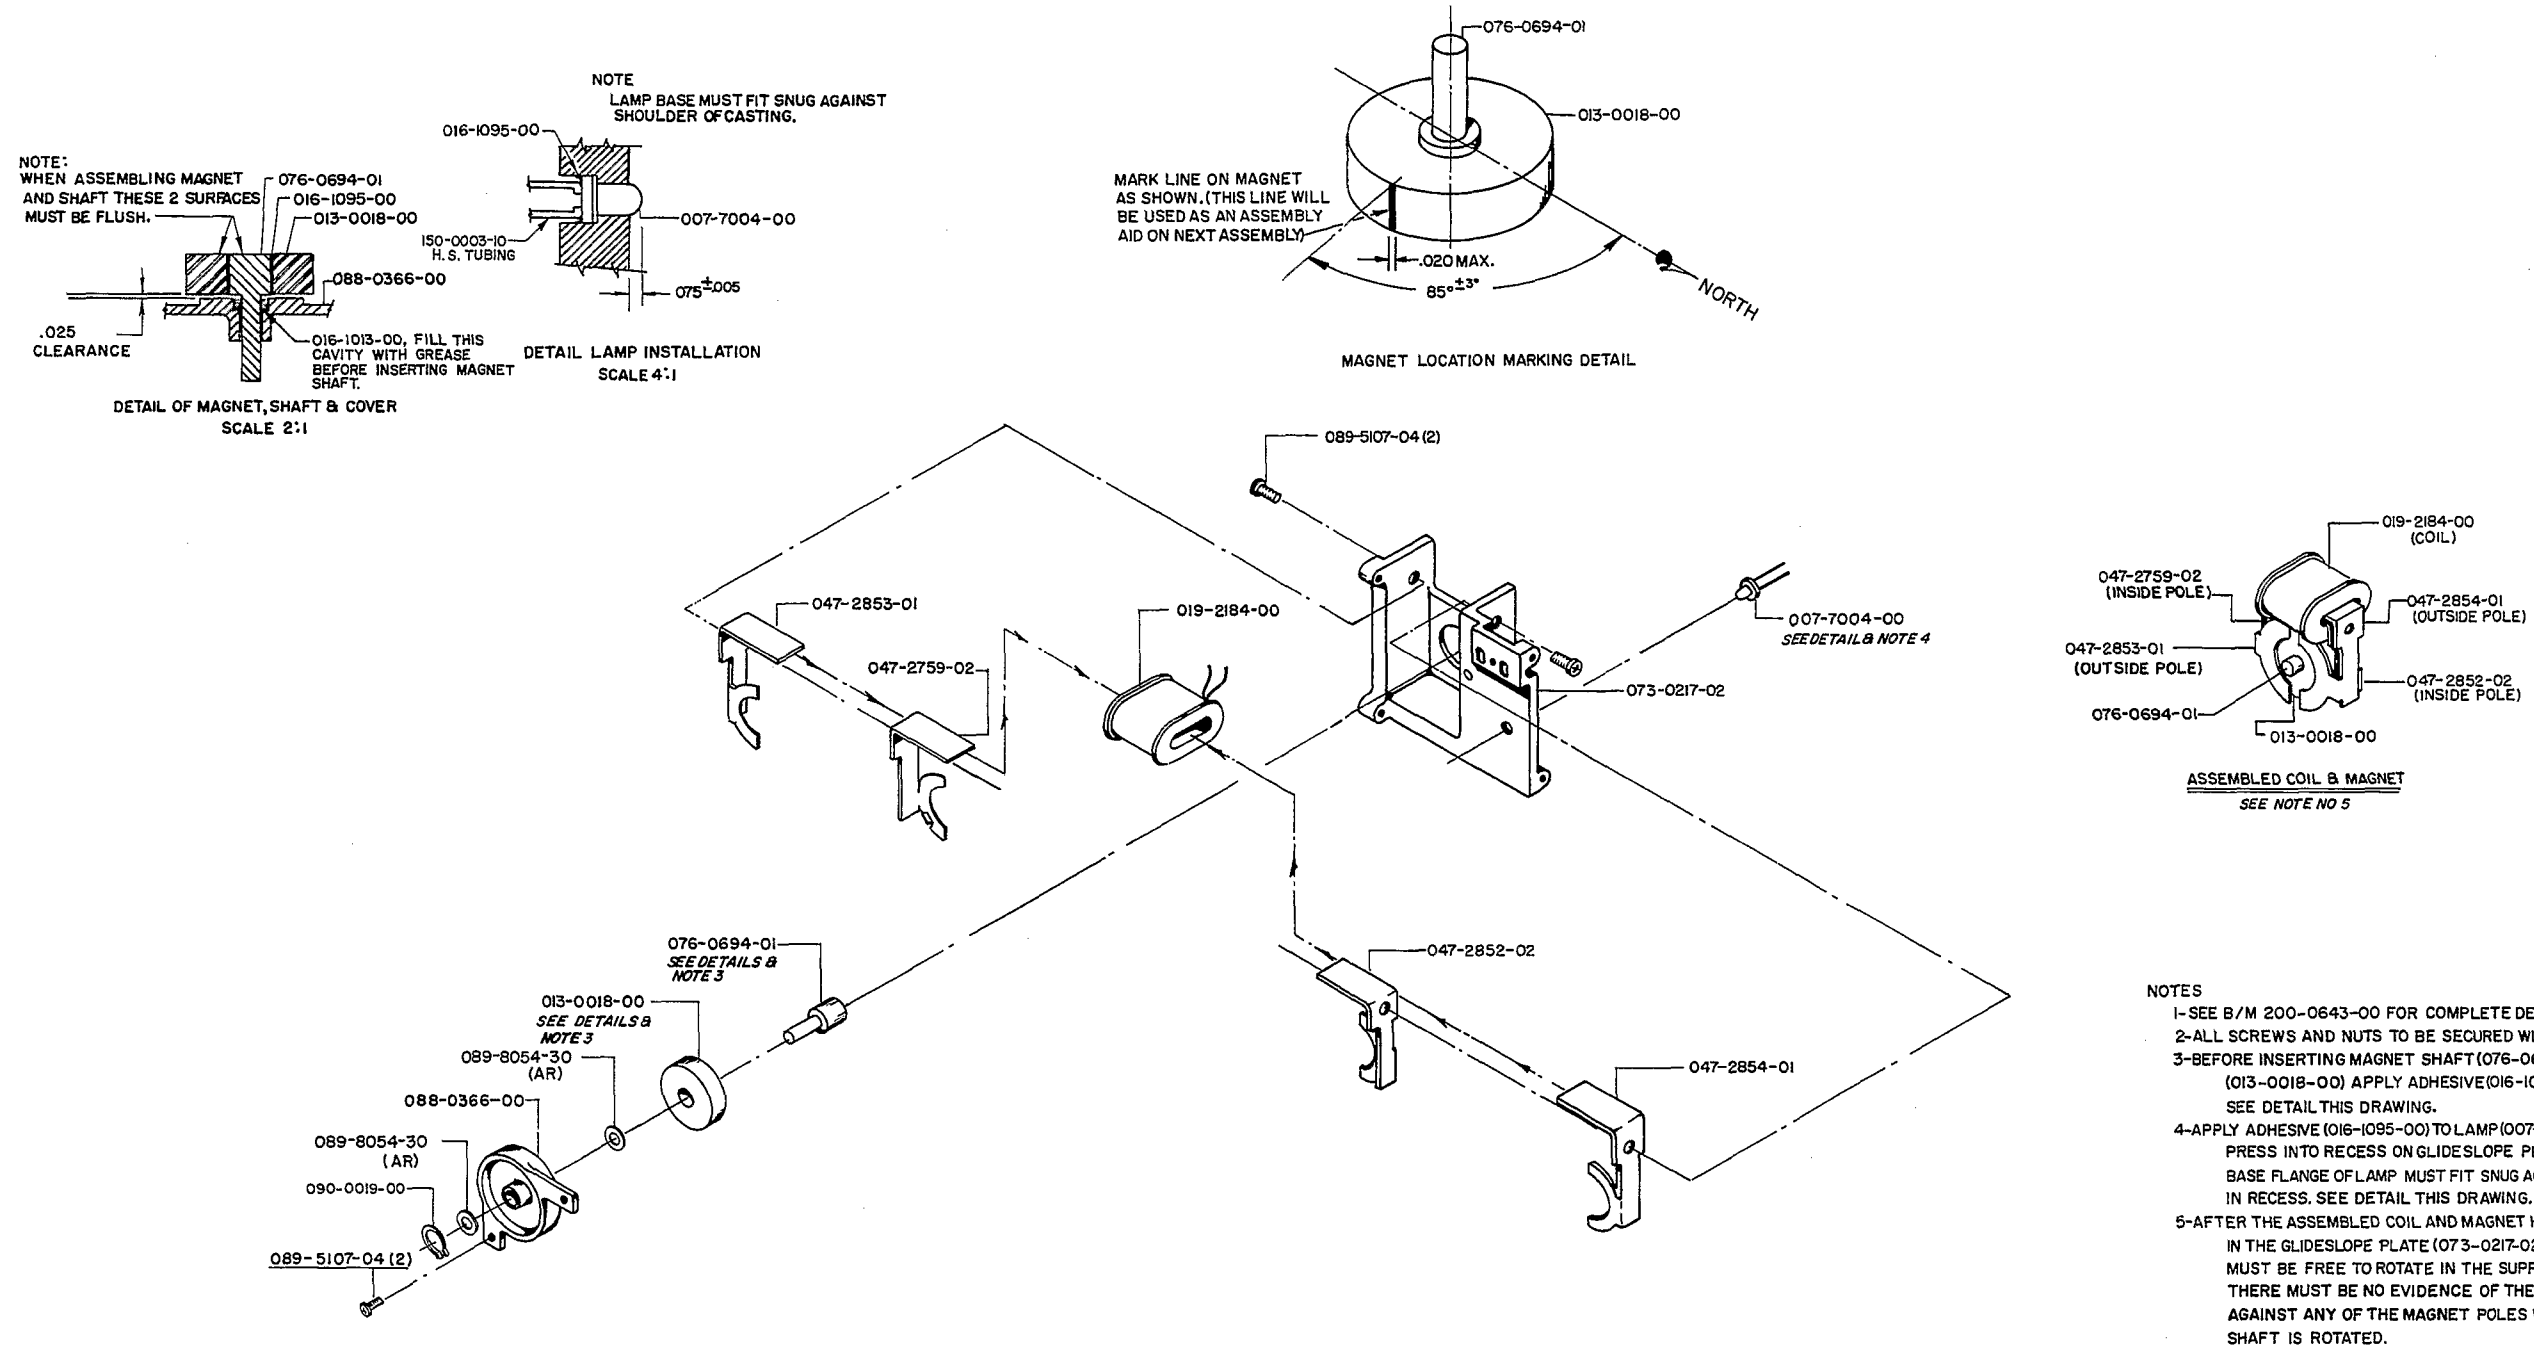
A KI 525A GLIDE SLOPE PLATE ASSEMBLY
